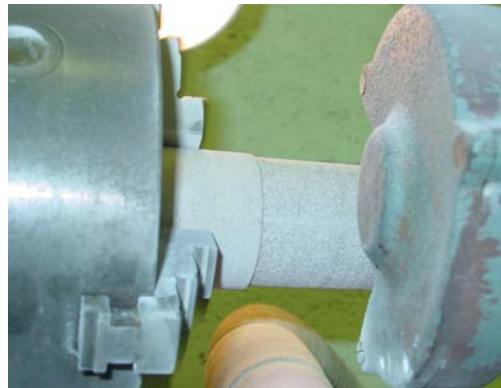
Drilling and machining process for a two inch diameter cores.
